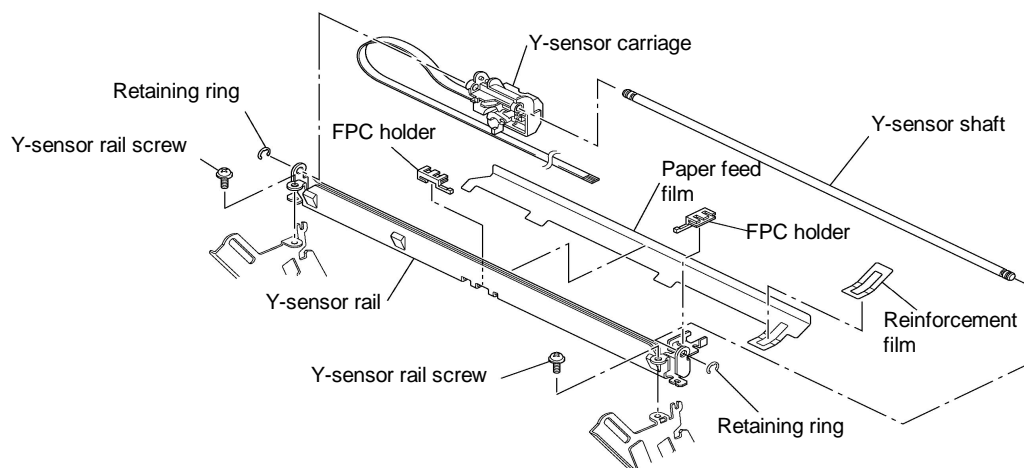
Disassembling the Y-sensor Rail Unit
